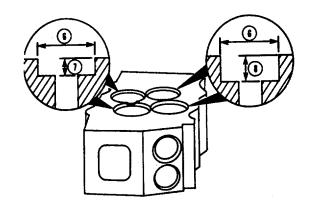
Valve Seat Insert Bore Measurement.
